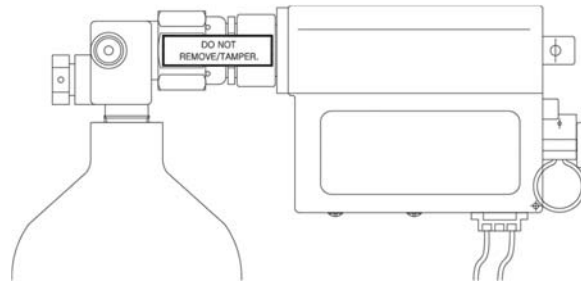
Solenoid cutter-cylinder actuation valve tamper sealing.
